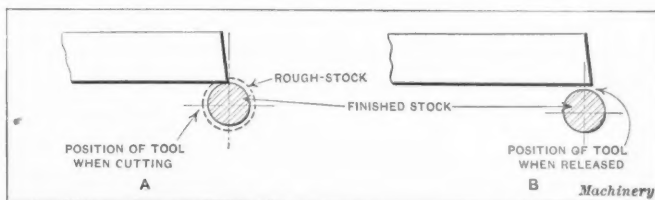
Diagram showing Different Positions of Box-tool Cutter held in Tool shown in Fig. 16
